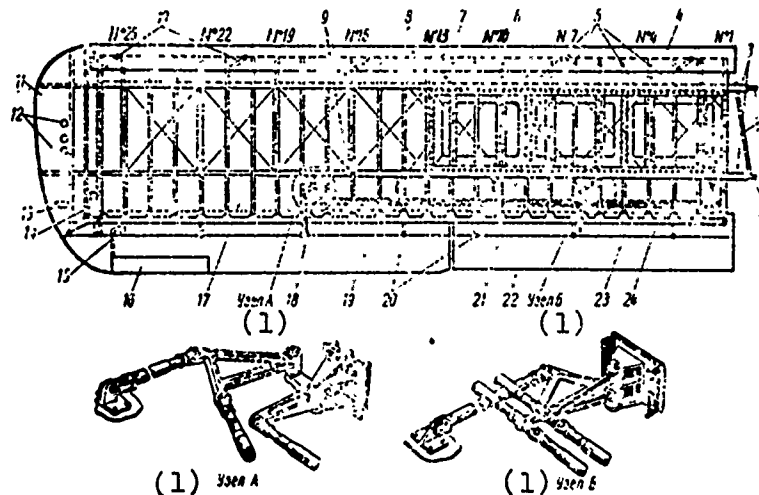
Diagram of the framework of the left detachable part of the upper wing: 1 - attachment points of the wing to the fuselage; 2 - tubular strut; 3 - spars; 4 - slat; 5 - fuel tank spars; 6 - fuel tanks; 7 - shock cord of slat; 8 - intrawing wire strips; 9 - attachment points of the biplane strut to the wing; 10 - slat actuating arm; 11 - wing tip; 12 - holes for lightening; 13 - openings for assembly and disassembly of flap and aileron control rods; 14 - weight compensator of aileron; 15 - UT-6 electrical mechanism; 16 - aileron trim tab; 17 - skin of the trailing edge of the wing; 18 - aileron control rod mounting bracket; 19 - aileron; 20 - bearing brackets of ailerons and flaps; 21 - attachment of fuel hatch panels; 22 - flap; 23 - rigid flap control rods; 24 - rigid aileron control rods.
